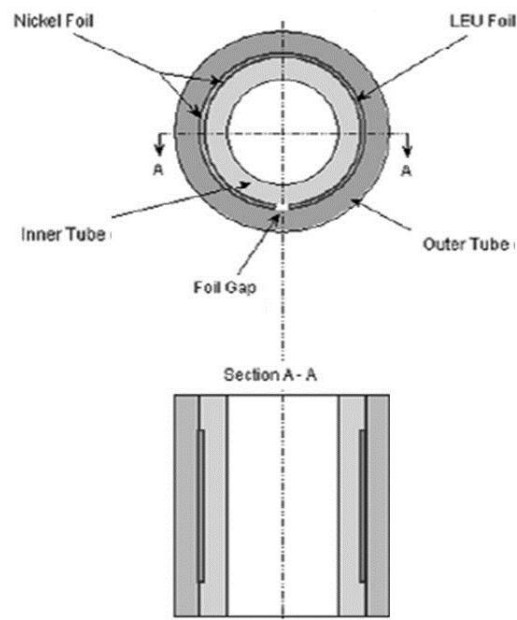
Dimensions and Cross Sectional view of the LEU annular target [31]
